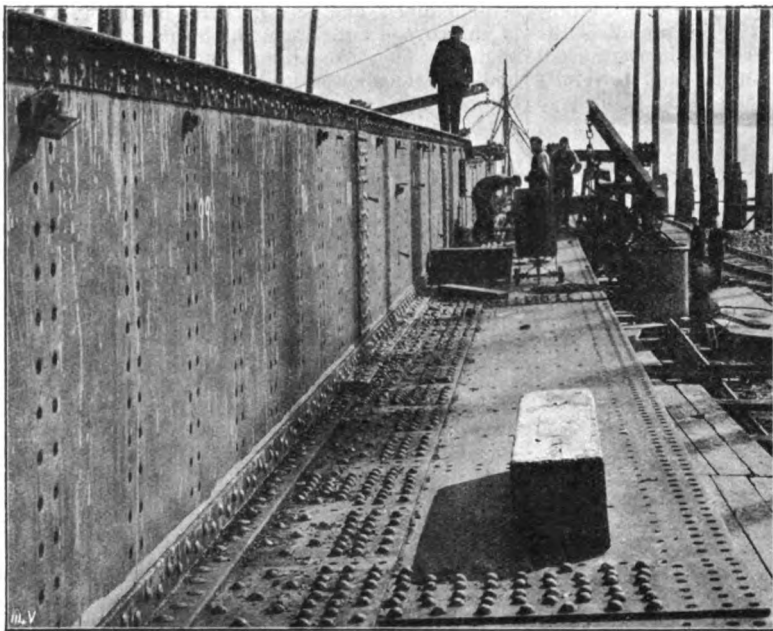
KEEL AND CENTRE-LINE GIRDER.
